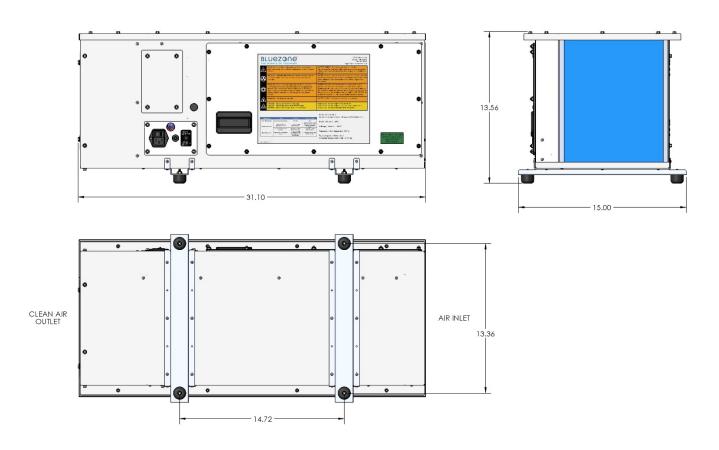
Bluezone Model 450 Overall and Mounting Dimensions (units in inches)
